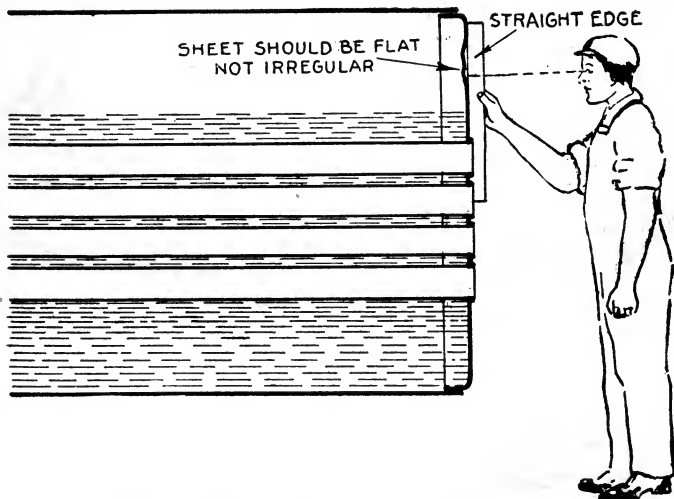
,203.—*What to look at, 13: the tube sheets.* They should be flat and not show any irregular surfaces.
